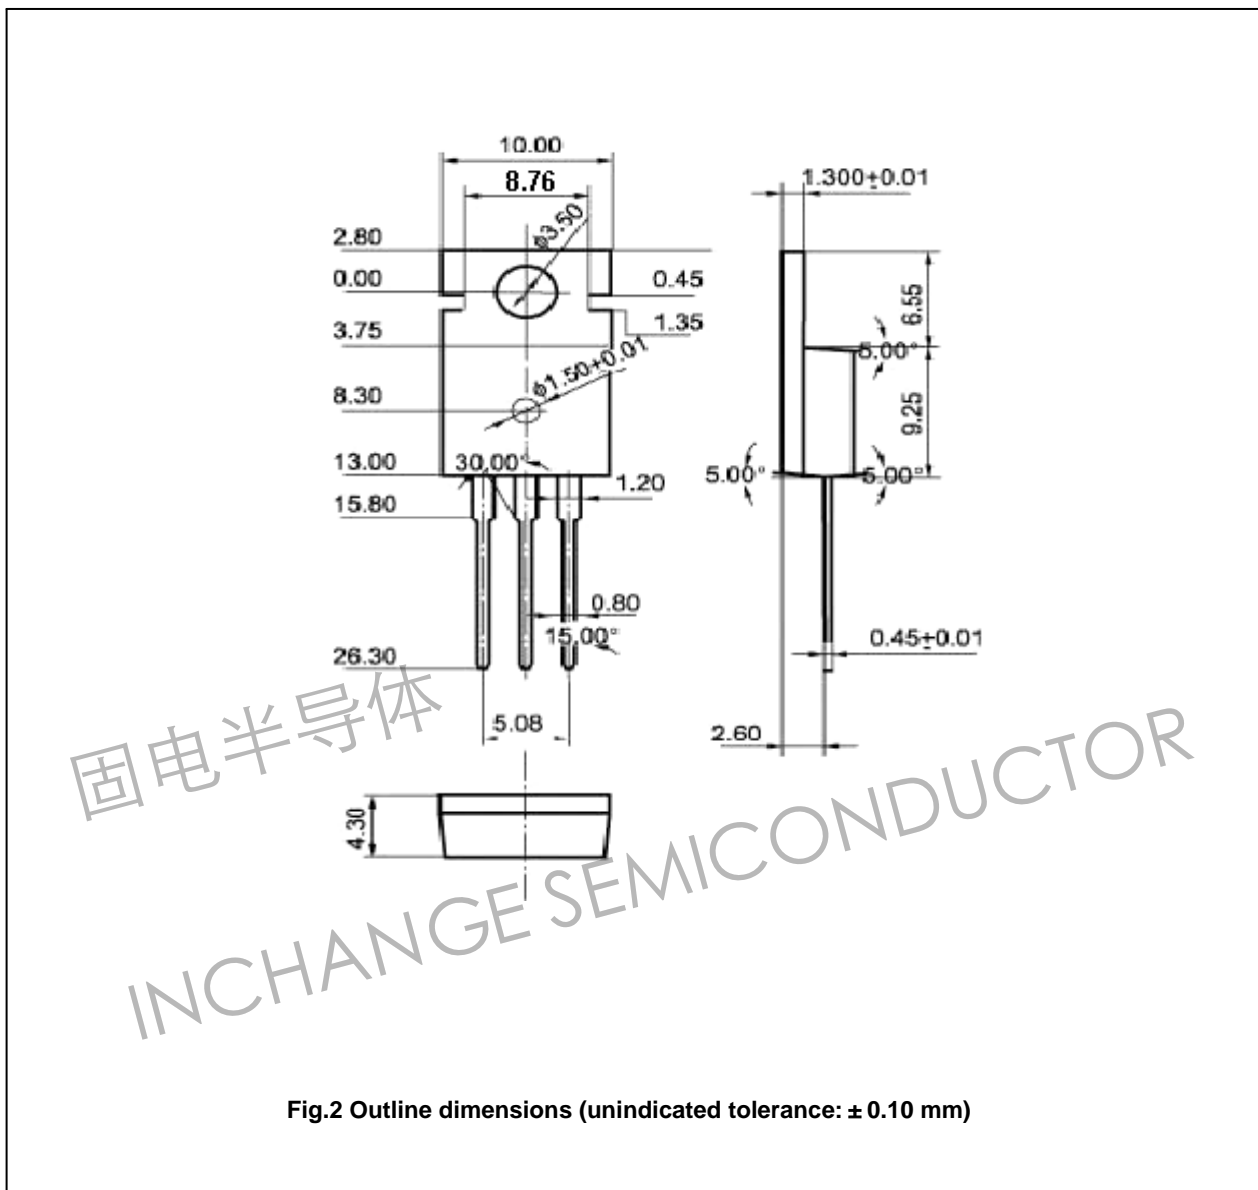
Outline dimensions (unindicated tolerance: ± 0.10 mm)
